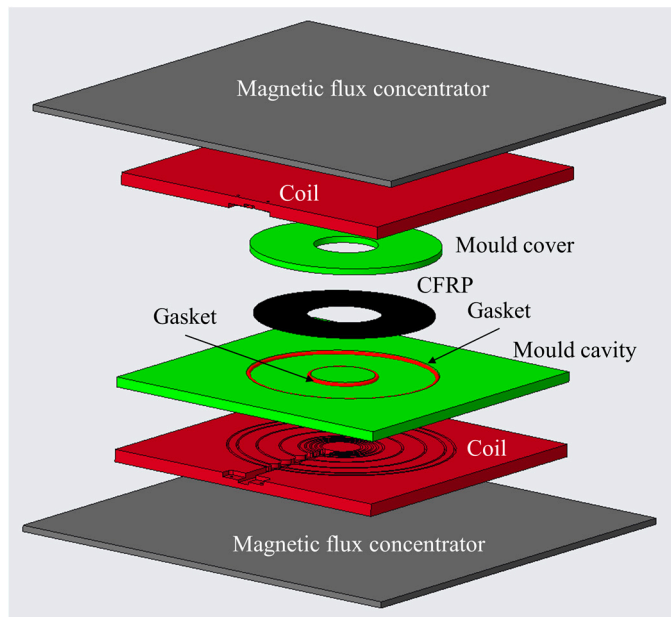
Exploded 3D view of the induction curing tool. The cavity has an inner diameter of 100 mm, an outer diameter of 300 mm, and a thickness of 6 mm (CFRP plates with a maximum thickness of 6 mm can be moulded).
